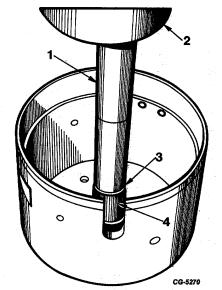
Installing Upper Bushing Using Bushing Installer SE-1955-7
